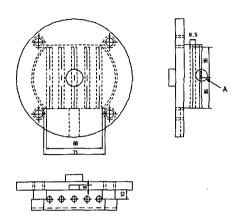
Molding machine and press-type mold for DSF; press-type mold for DSF
